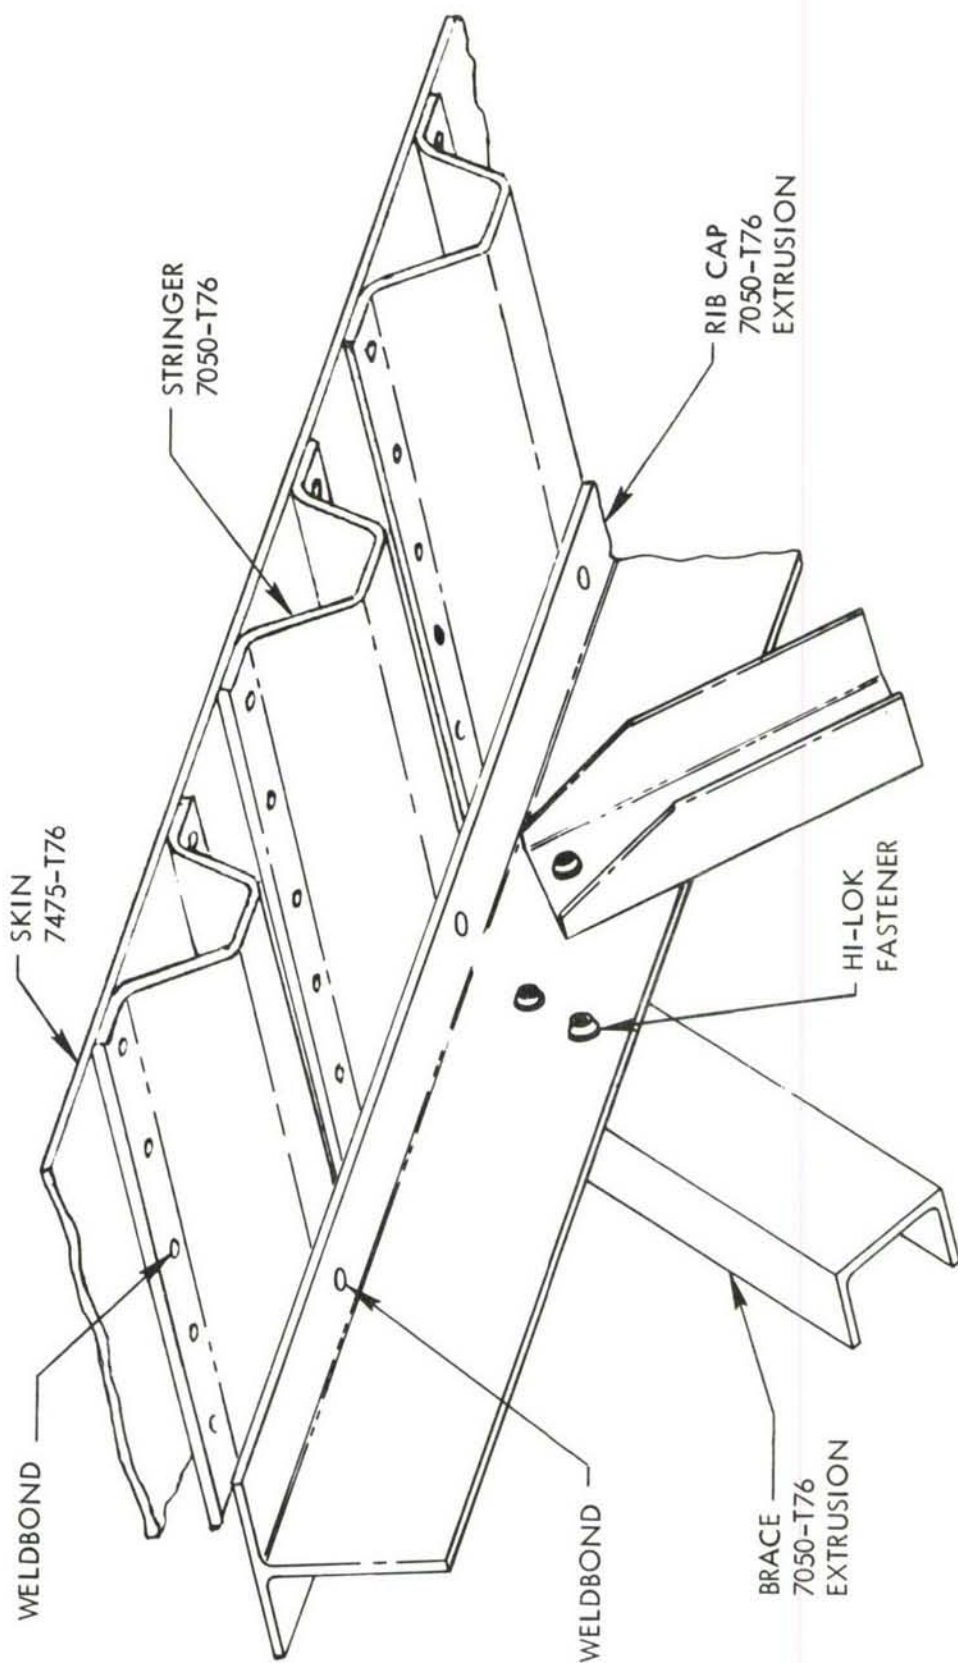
RIB TO COVER ATTACHMENT - HAT STRINGER CONFIGURATION
